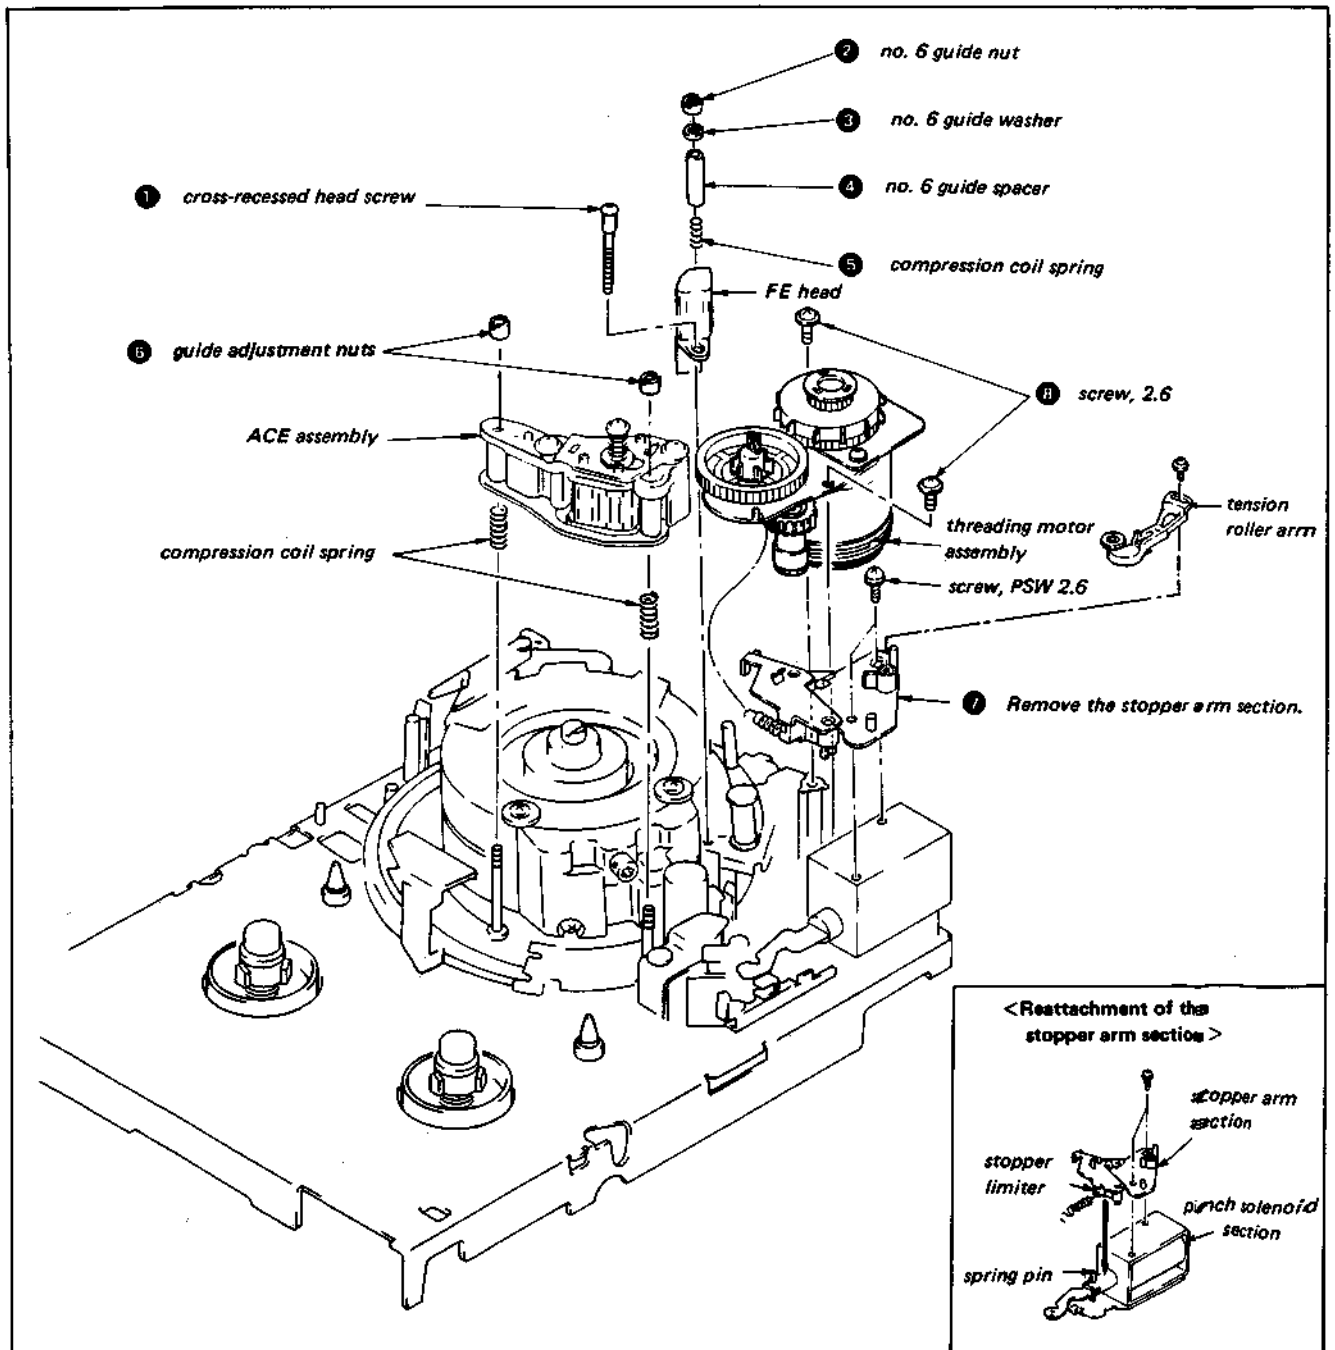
Removal of the ACE assembly, FE head and threading motor.
